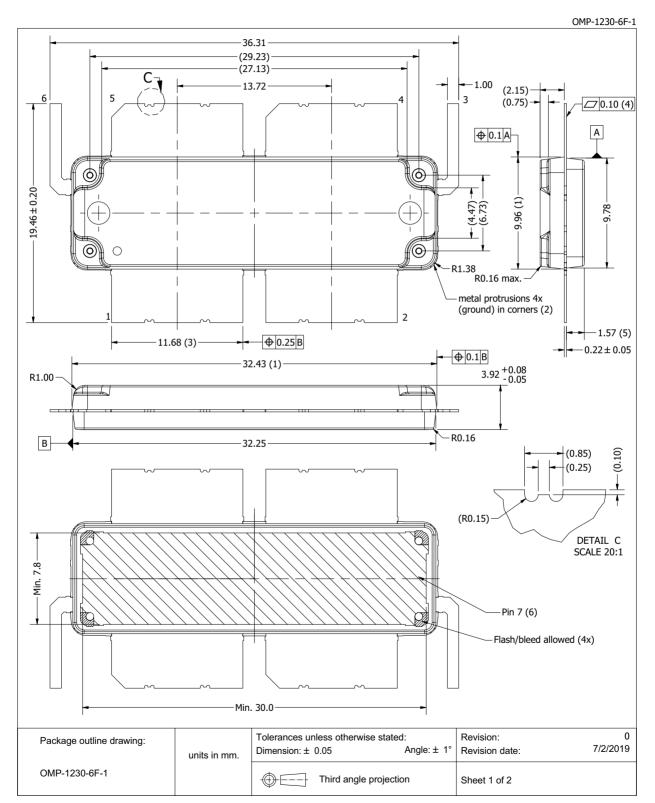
Package outline OMP-1230-6F-1 (sheet 1 of 2)
